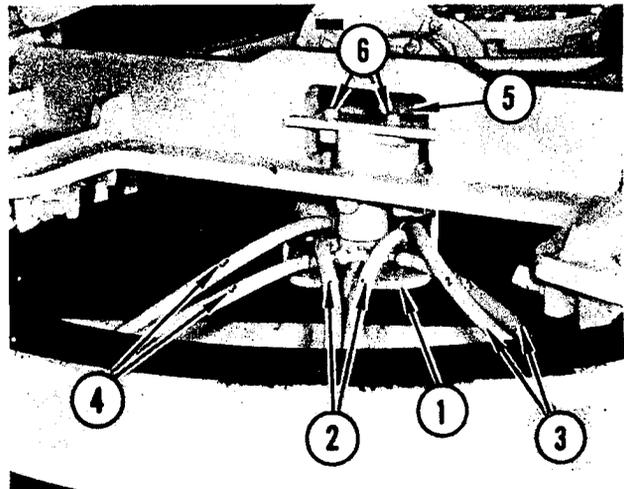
ROTARY VALVE HOSE DISCONNECTIONS
